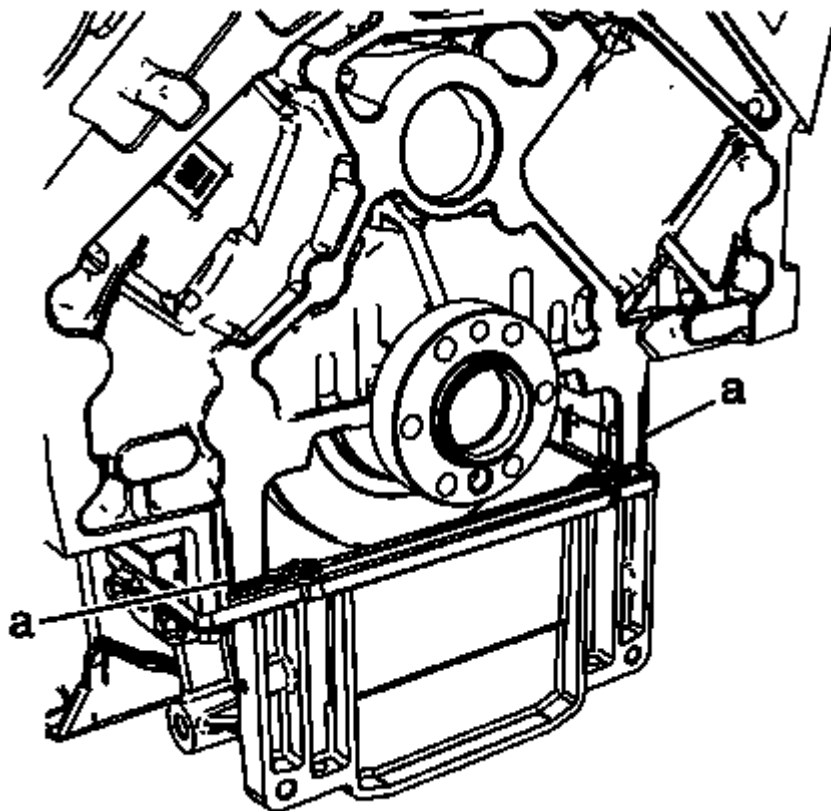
Applying Sealant To Joints At Rear Of Block/Pan
